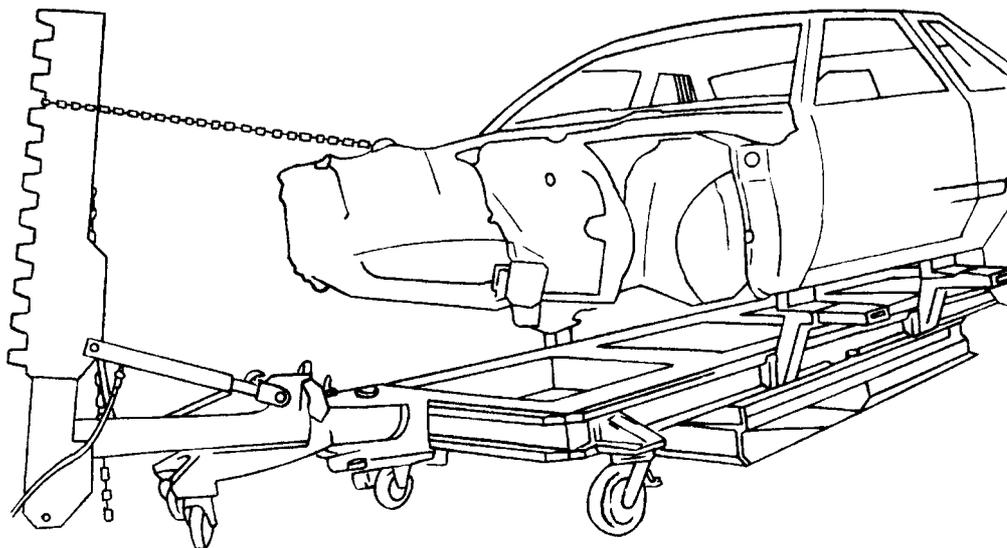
Mounting Bench of Universal Dressing Machine
